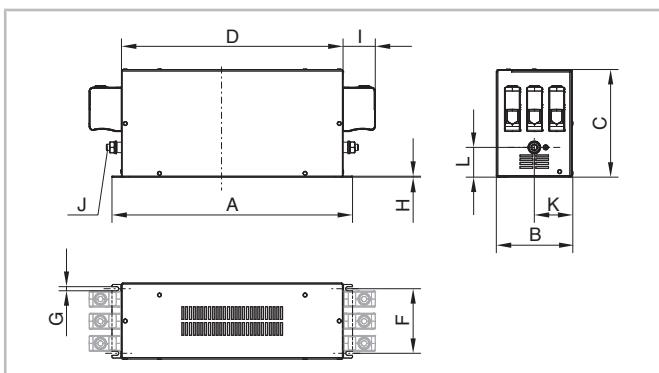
Dimension drawing of RFI filter 3258-180-40
